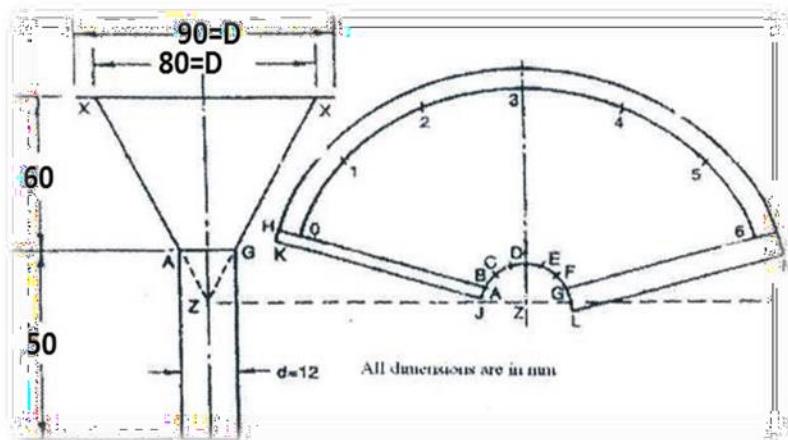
Approximate dimensions of the funnel to be fabricated.
